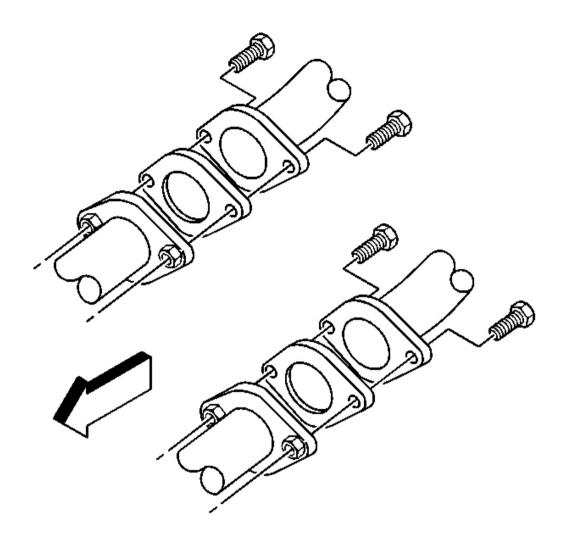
Exhaust Muffler, Bolts & Gaskets Courtesy of GENERAL MOTORS CORP.
